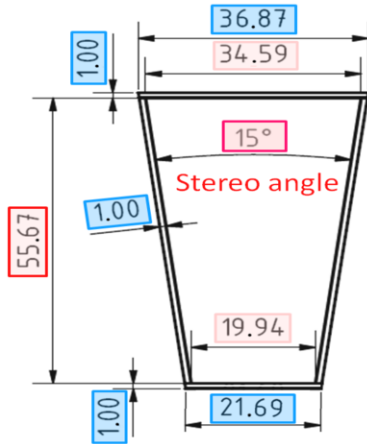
Trapezoidal strip sensor geometry. Dimensions are in mm.
